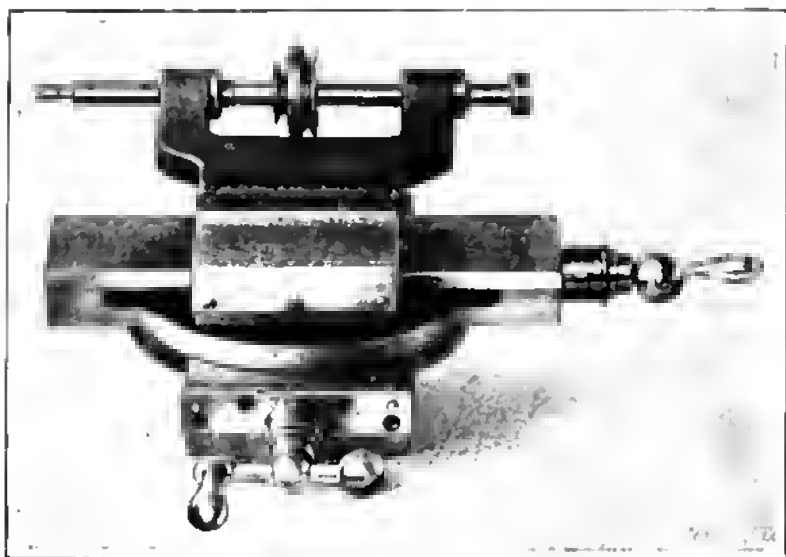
Slide Spindle Grinding Attachment for the Bench Lathe
